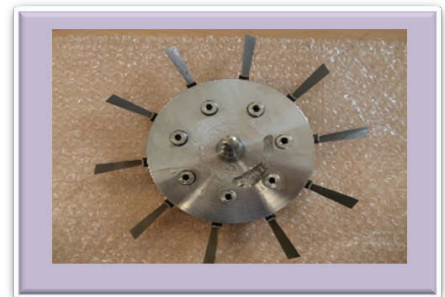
Coated & uncoated blades mounted to the engine test rotor assembly
